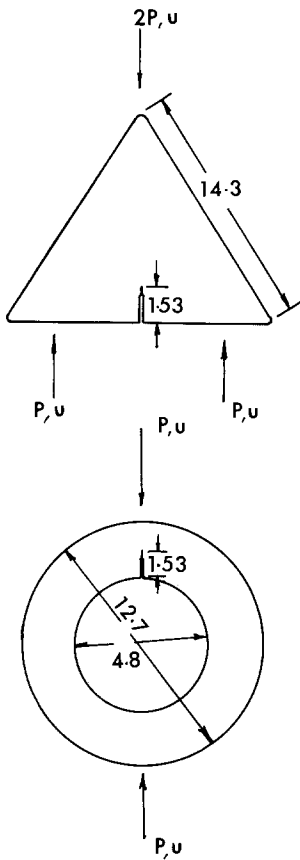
Available tool inserts used as fracture toughness testpieces (all dimensions in mm, 4.8 mm thick).
